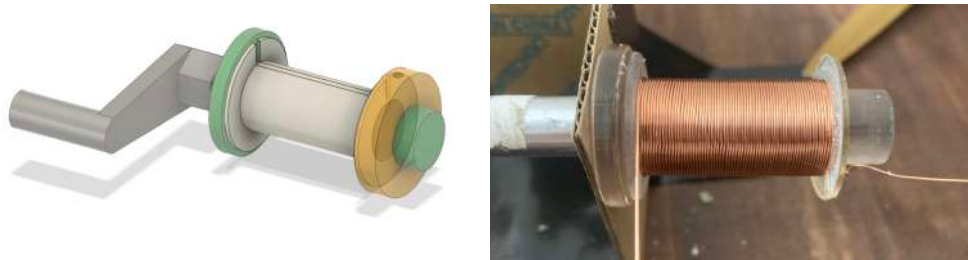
Winding of an electromagnet using 3d printed guide rails.
